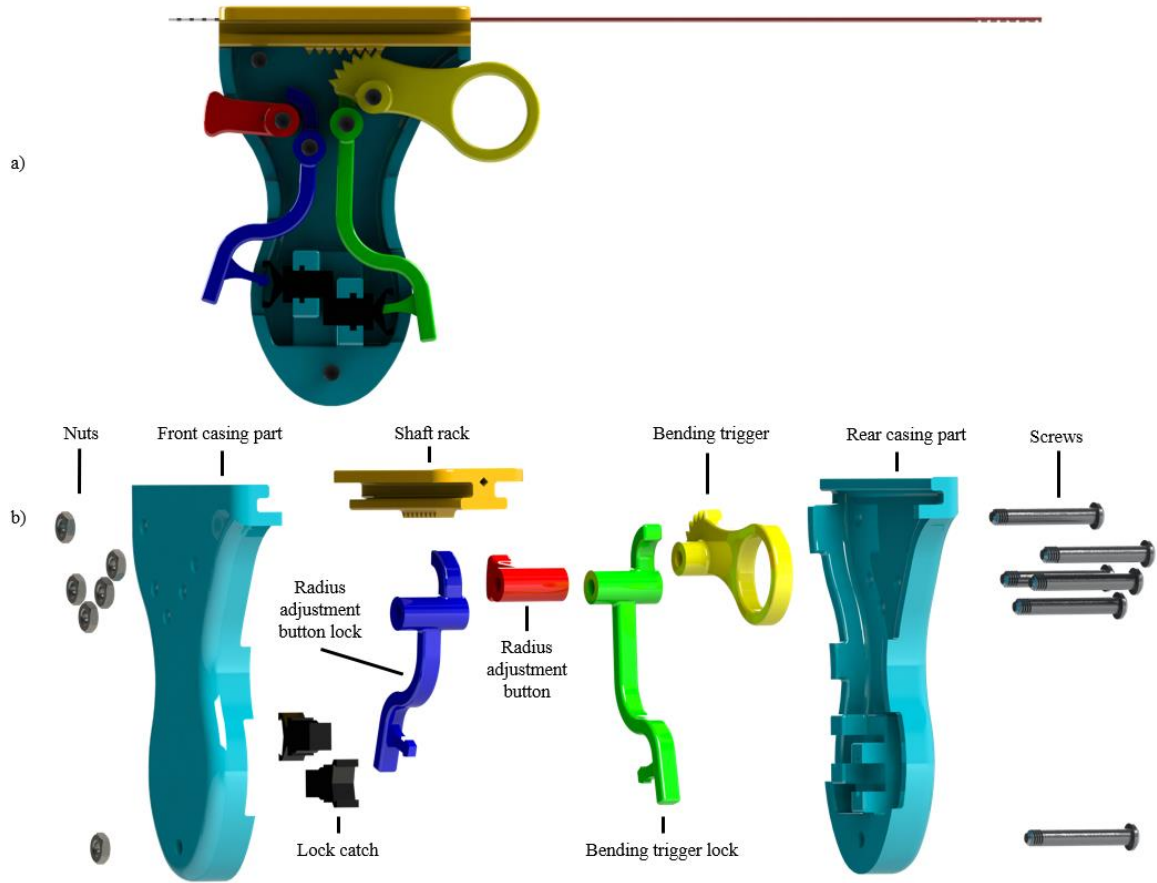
The assembled handle without the front casing part (a), and an exploded view of all the handle parts (b).
